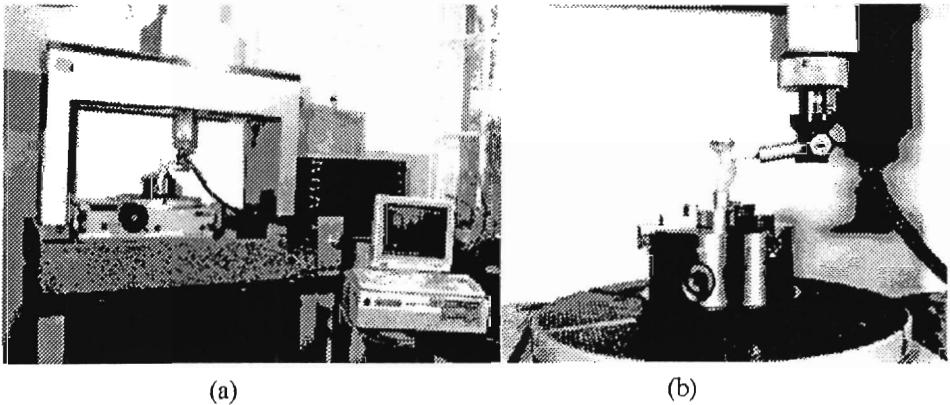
Coordinate Measuring Machine: (a) general view of the stand, (b) radial bone head and the measurement probe
